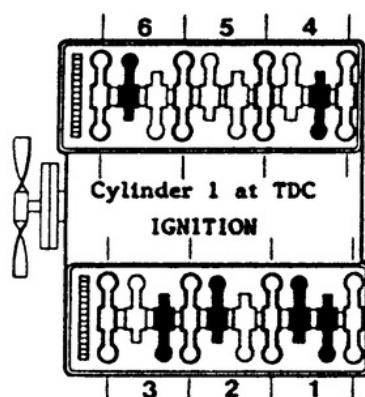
Adjust these valves with the No. 1 piston at TDC
